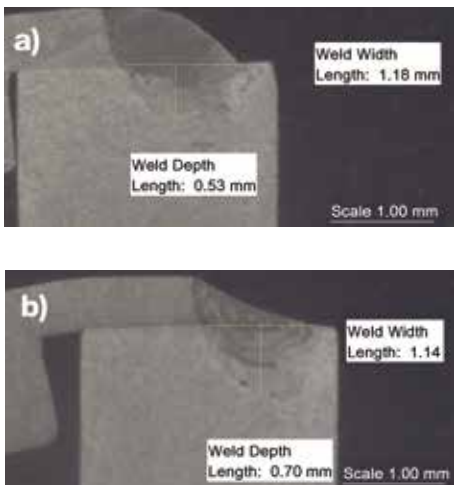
Weld cross section of opposite side of a package with slight lid offset.
